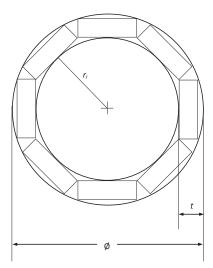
Final AutoCAD drawing of bamboo splitting and the measurements made
